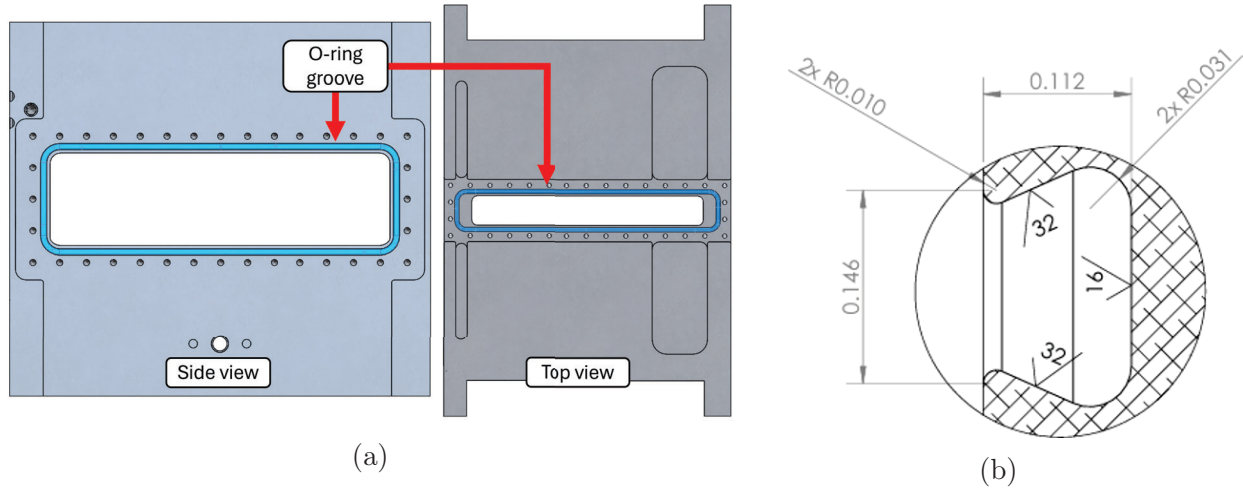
The cooling chamber uses O-ring grooves on the side and top surfaces to seal the inlet and outlet ports. These grooves use the standard nominal 1/8 in O-ring dovetail dimensions (in IPS units) shown in (b).
